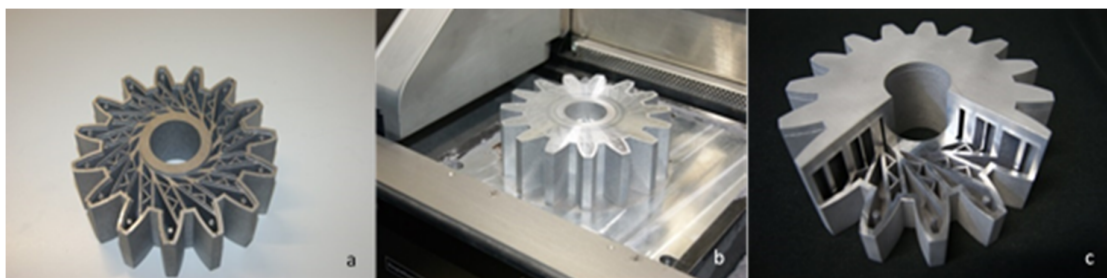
Building process of hollow gear: (a) first stage completed, (b) capping model (inside the printer), (c) side cut in the gear model after completion
